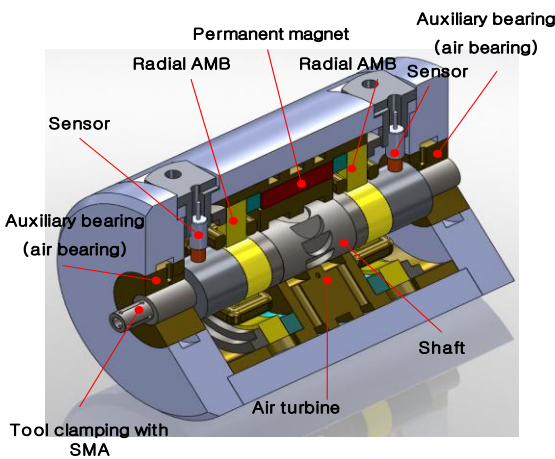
Micro spindle with active magnetic bearings and air bearings
